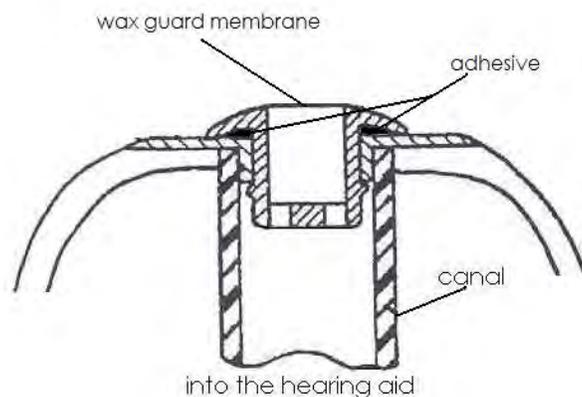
Outlet of the Hearing aid and the wax guard. Taken from [7]
